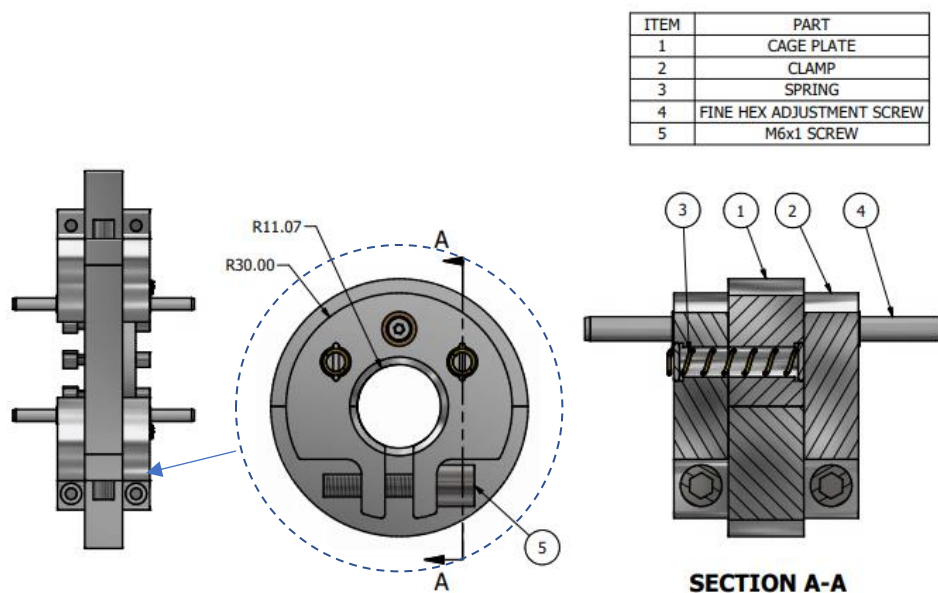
Side view of a cage plate showing detailed view of the clamp and spring in the cage plate assembly of the portable set-up.
